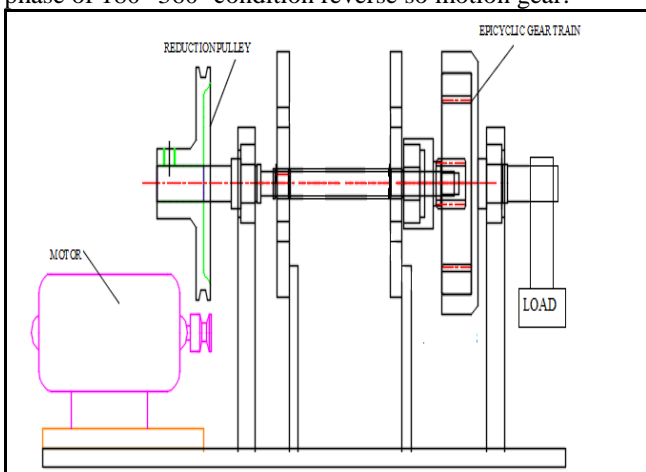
Layout of Test Rig for Eclipse Gear Box
